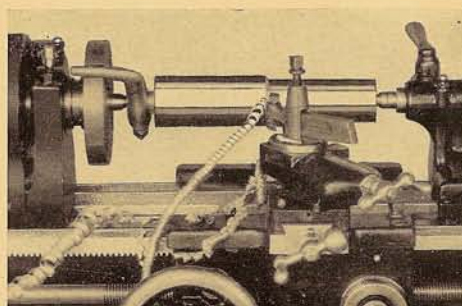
Reducing the Diameter of a $2\frac{1}{4}$ " Steel Shaft $\frac{1}{4}$ " in diameter in one cut.
